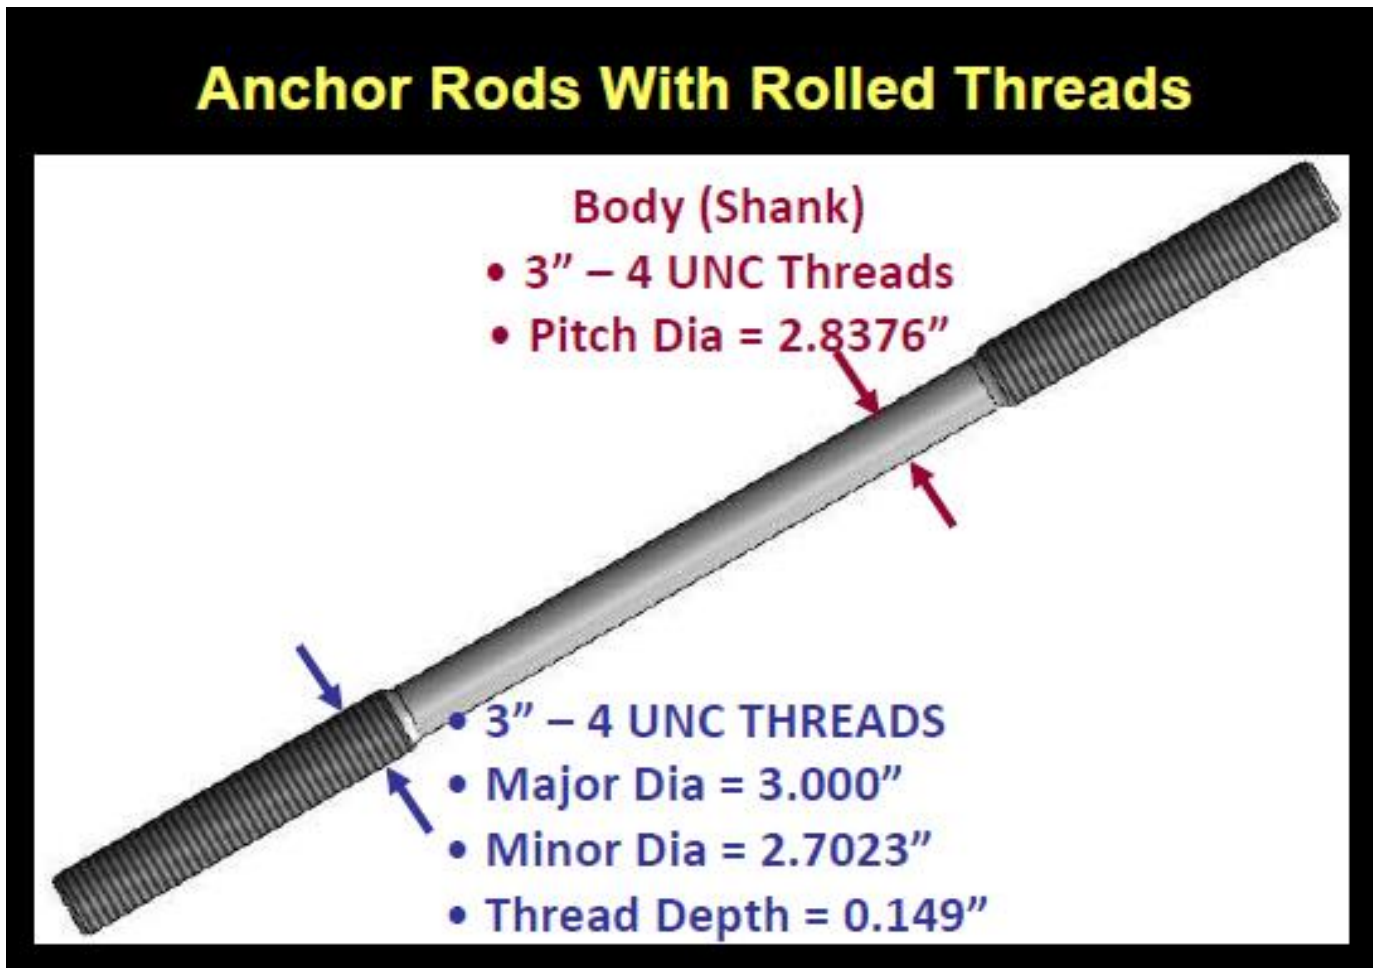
A 3 inch diameter rods with cold rolled 4UNC threads. The shank diameter is smaller than the thread major diameter.
